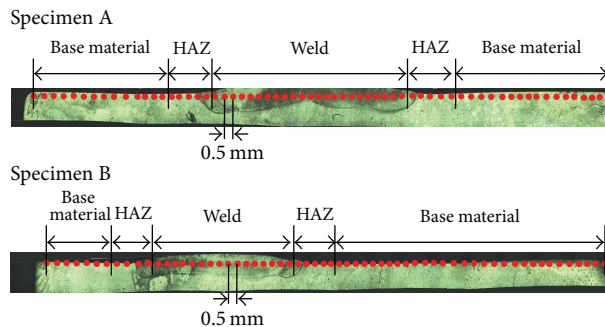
Weld specimens of SUS316L strip and their indented positions.
